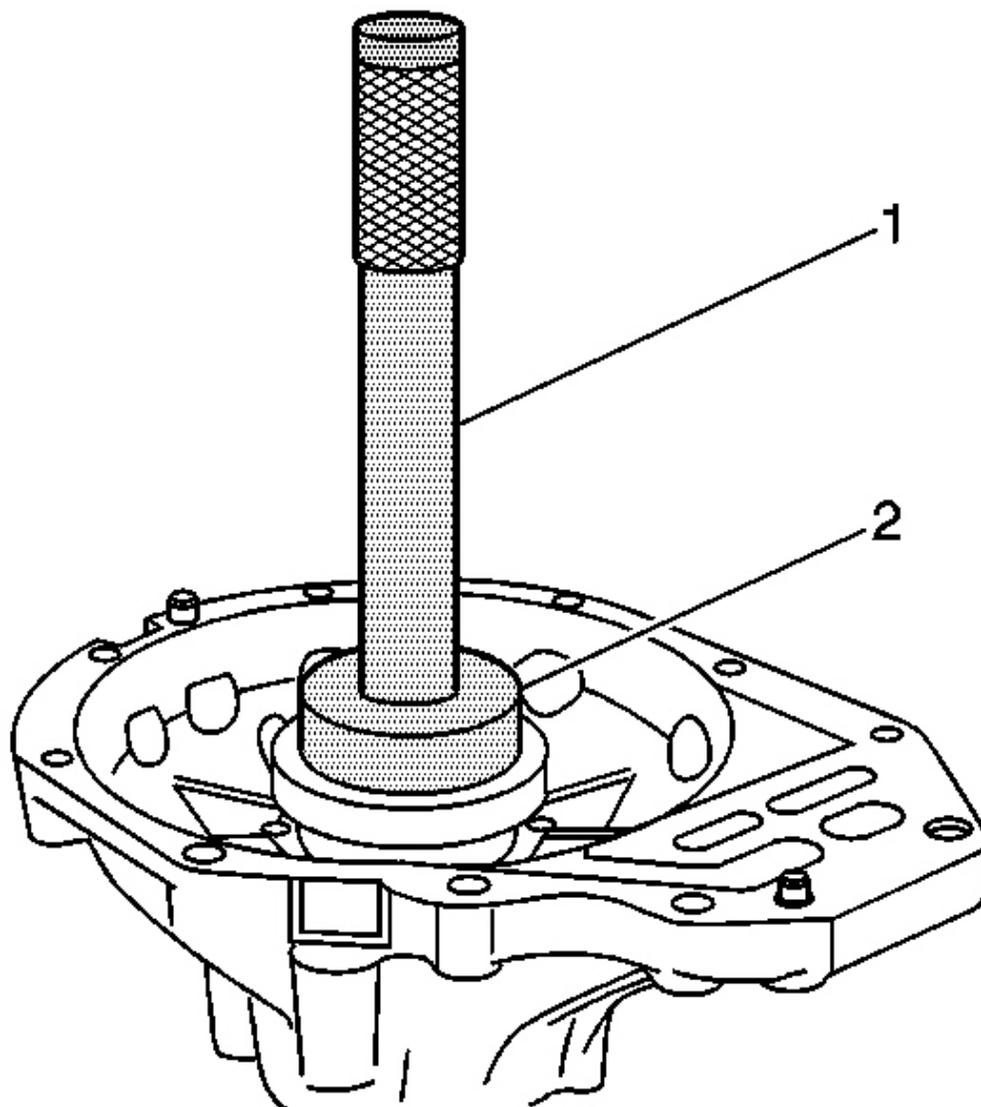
Installing Right Side Differential Case Side Bearing Cup Into Differential Carrier Case Using J 36603 & J 8092
